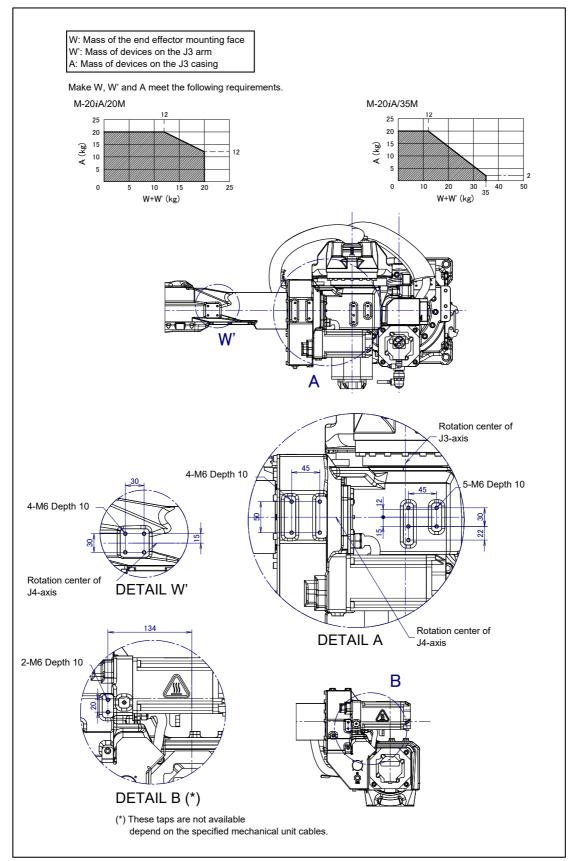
(b) Equipment mounting faces and load limitation (M-20iA/20M/35M)
